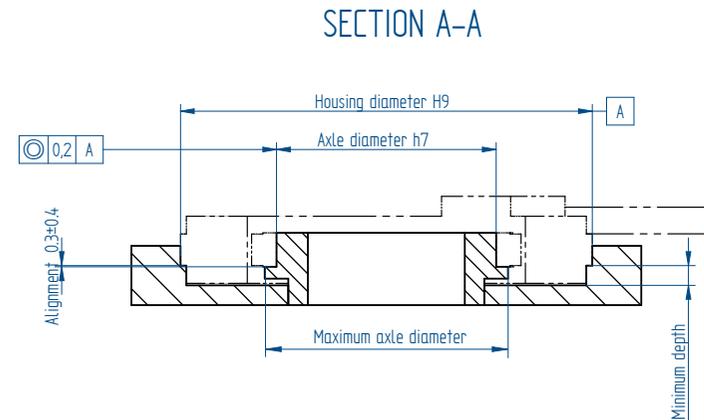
QTR 1xx housing requirement tolerances for mounting/centering purposes
